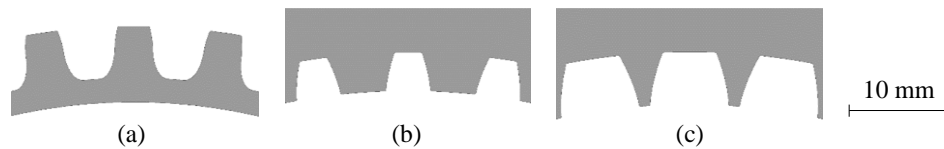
Calculated result of the tooth shapes of the gears for the experiment. (a) External gear. (b) Internal A gear. (c) Internal B gear.
